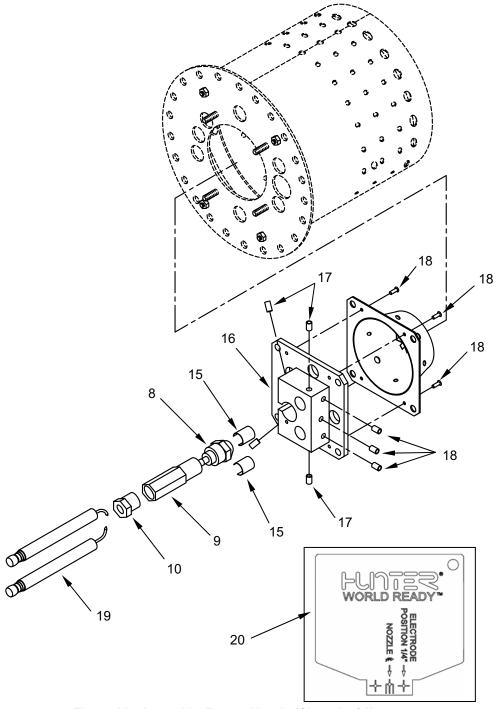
Assembly, Burner Nozzle (Sheet 2 of 2).
